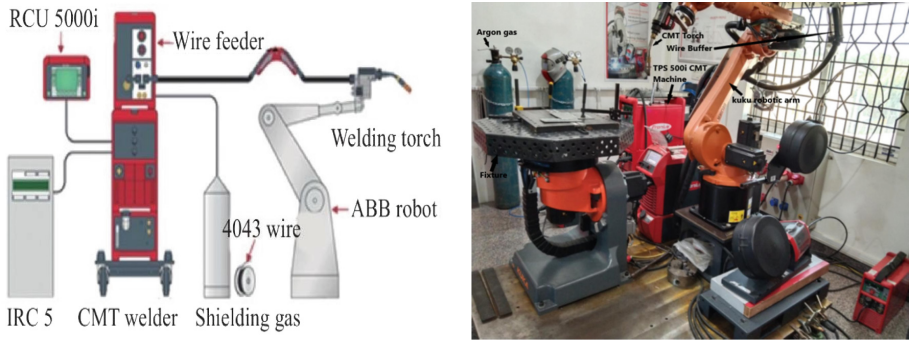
The pulsed CMT welding experimental setup (Fronius India Pvt. Ltd., Bengaluru).
